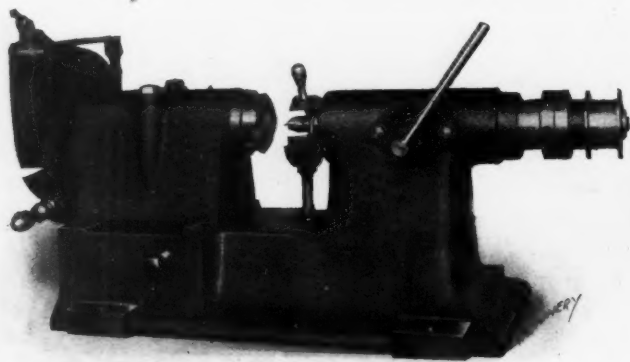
"Esco" Fuse Time-ring Grooving Machine, showing Arrangement of Work-holding Fixture and Milling Cutter
